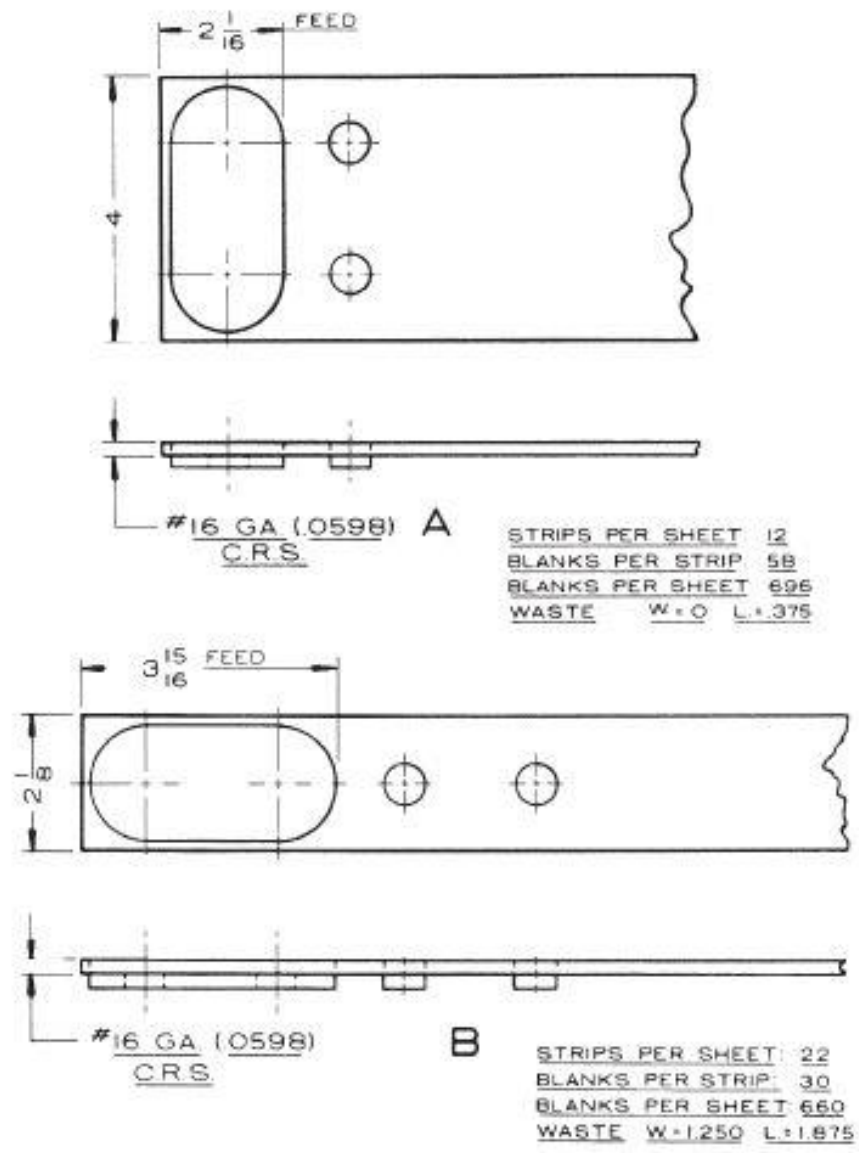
Complete strip layouts for blanks run either the wide (A) or narrow (B) way.
